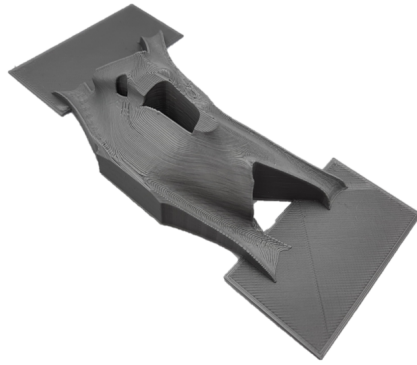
Finished PLA support structure/mould to print the bracket on.
